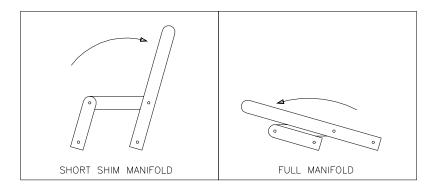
SHIM MANIFOLD SELECTOR VALVE SCHEMATIC
